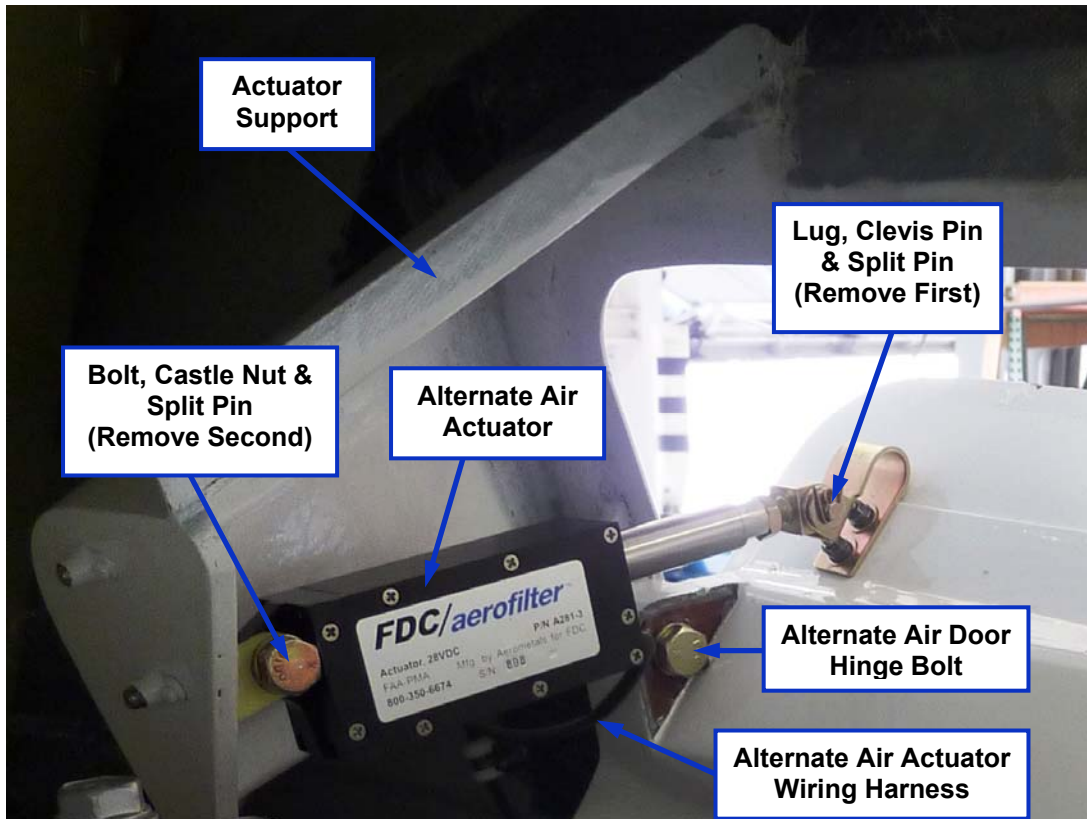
Alternate Air Door System and System Disconnect Location
